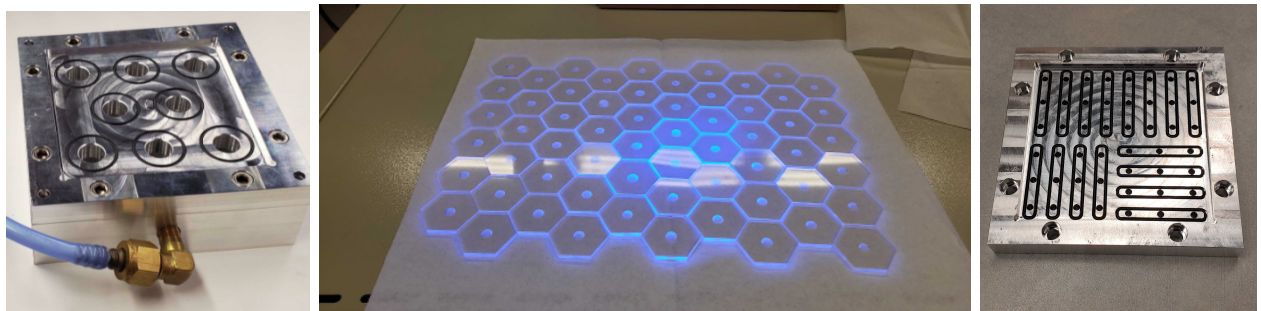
Left: Vacuum chuck used to machine EJ-212 scintillator sheets into cells with dimple geometry (with hexagonal shape, for the calorimeter insert). Middle: example of machined cells. Right: Vacuum chuck designed for machining FDC strips.
